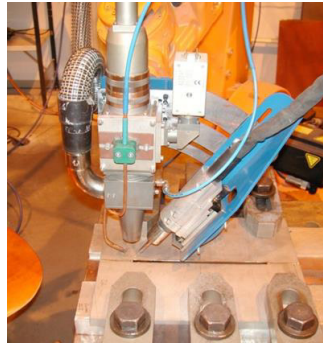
Welding set-up showing general arrangement used in the welding experiment.
